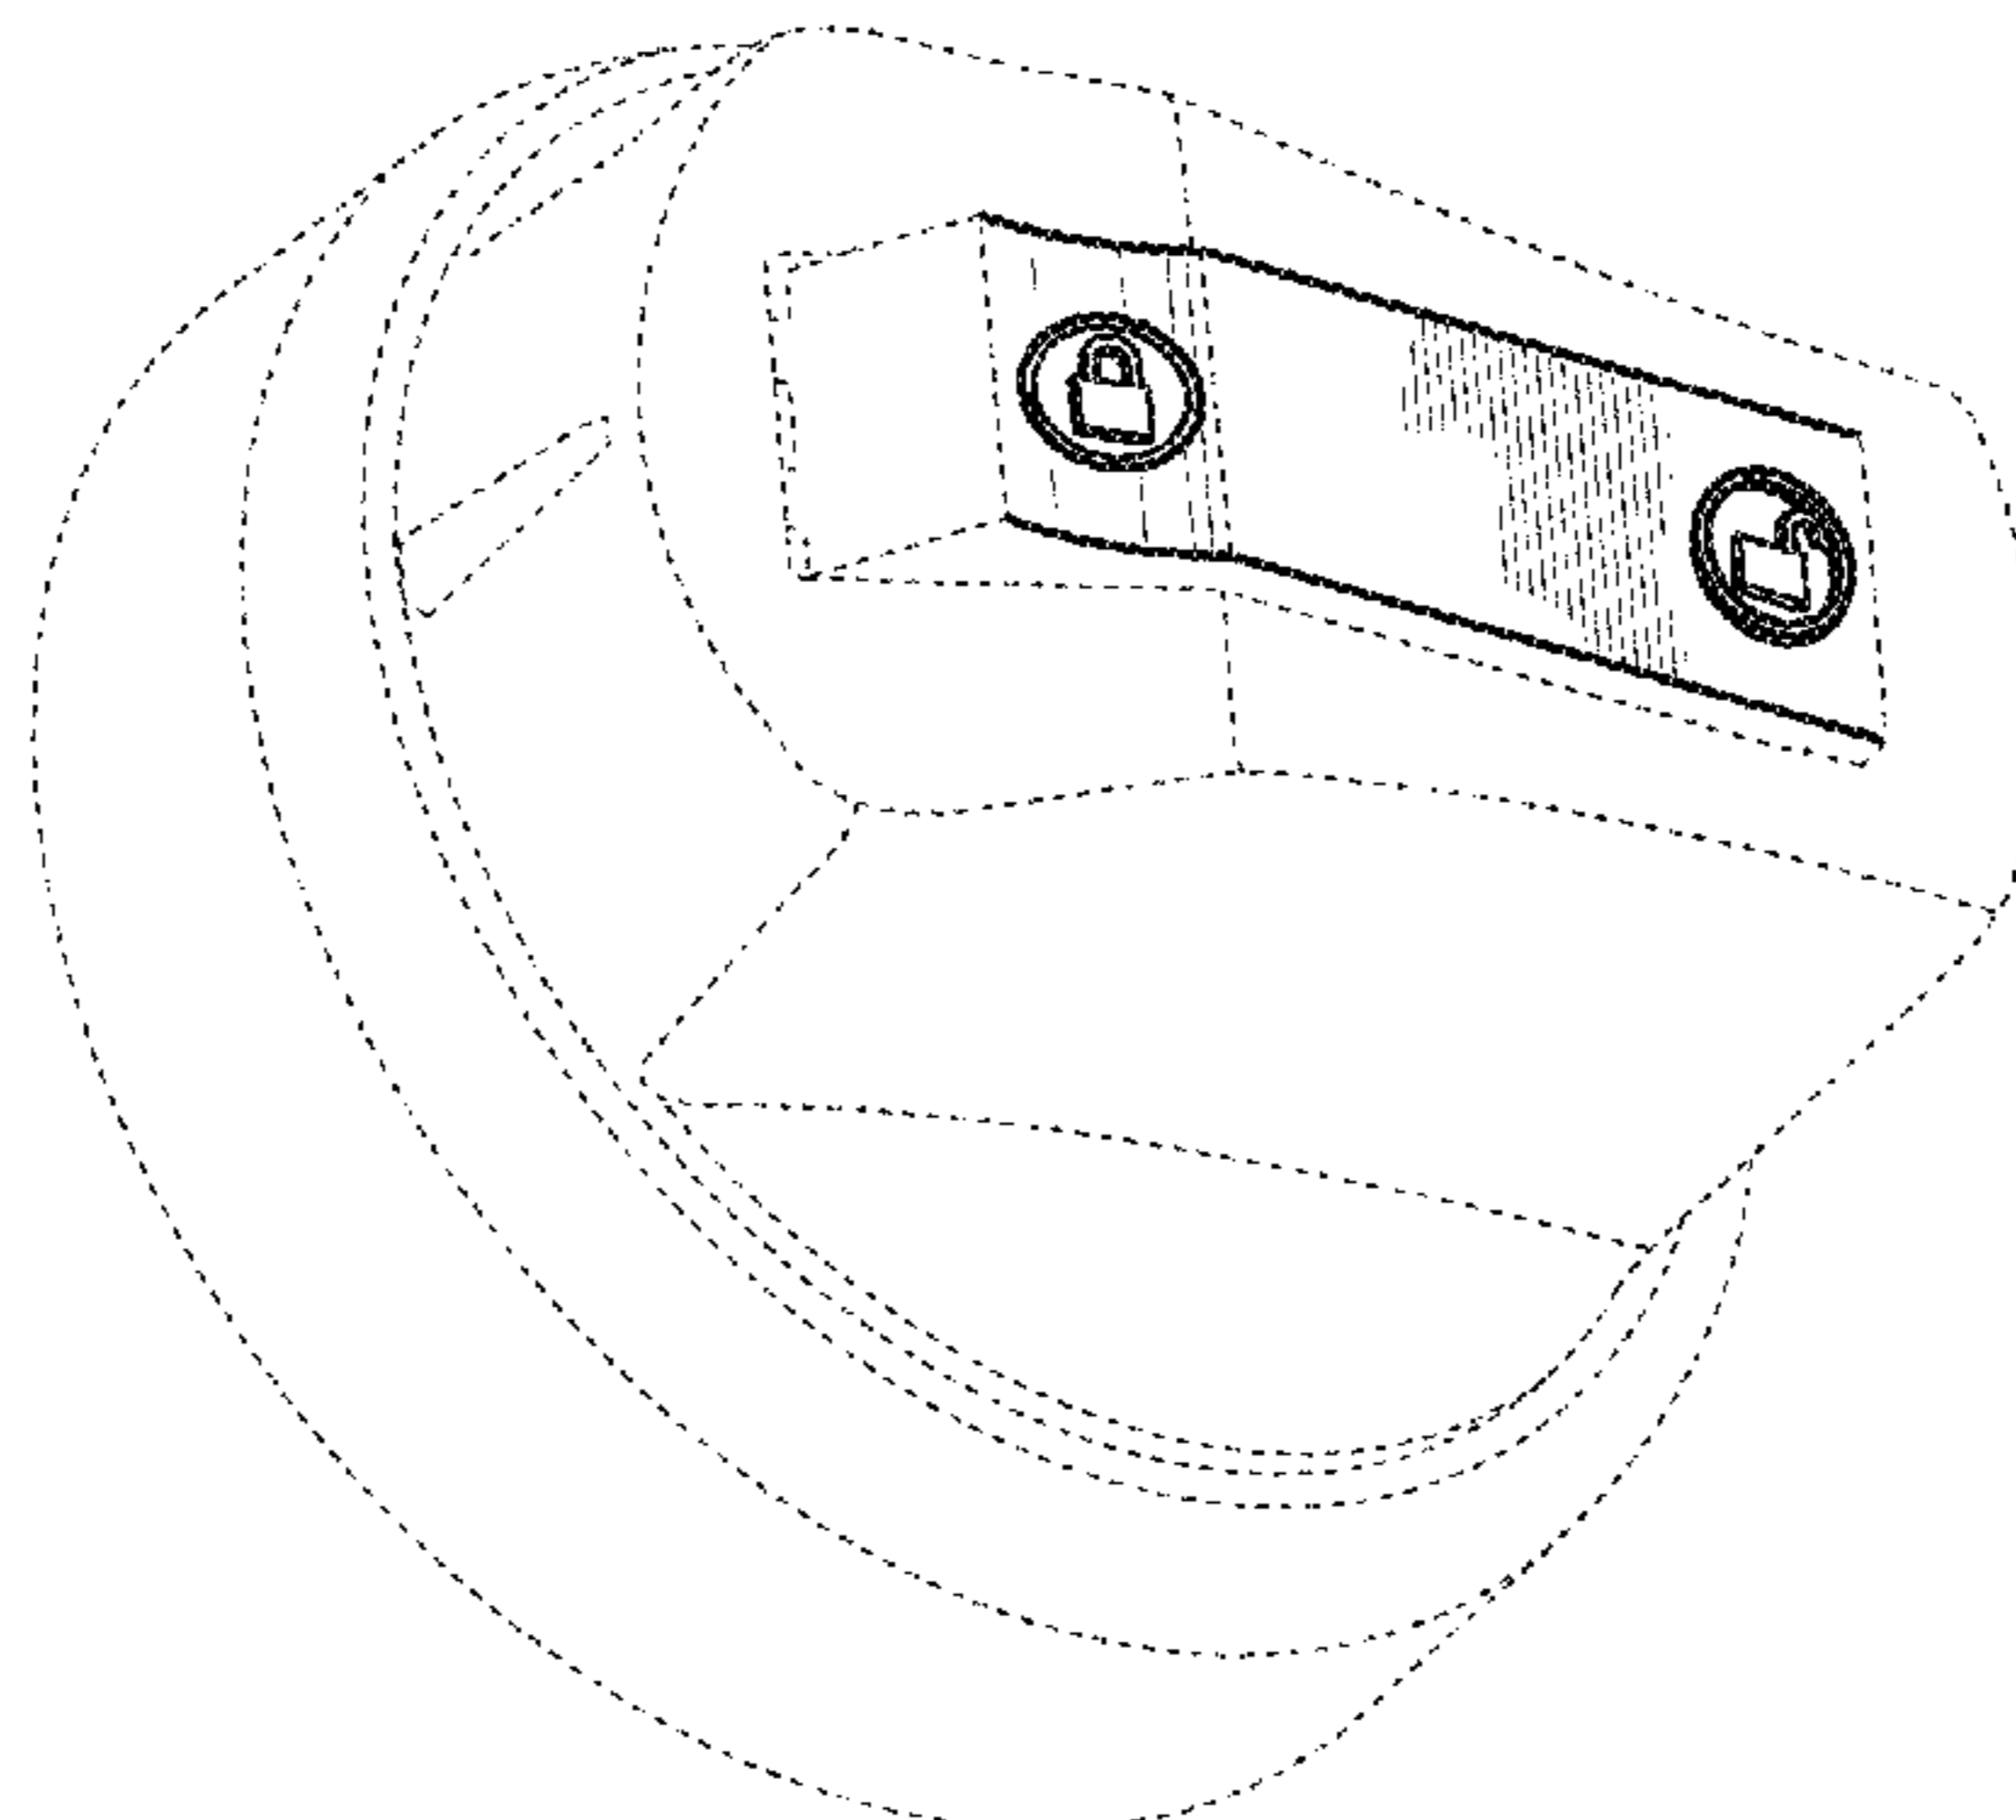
is a front, side perspective view of a switch handle for circuit breakers showing our design;
